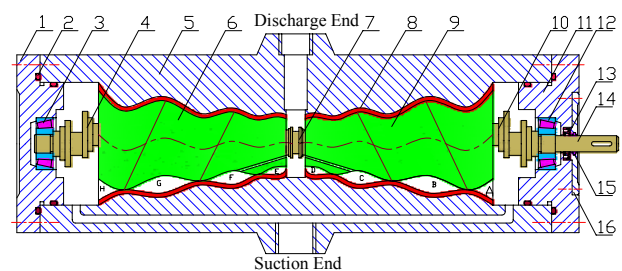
The structure diagram of opposed biconical cone screw high-pressure seawater hydraulic pump: 1, 11 - big end cover; 2 - O-shape sealing ring; 3, 12 - bearing; 4, 7, 10 - universal joint; 5 - shell; 6, 9 - cone screw; 8 - flexible wear bush; 13 - FB-type rotation axis lip shape seal ring; 14 - rotary shaft; 15 - felt seal ring; 16 - small end cover
